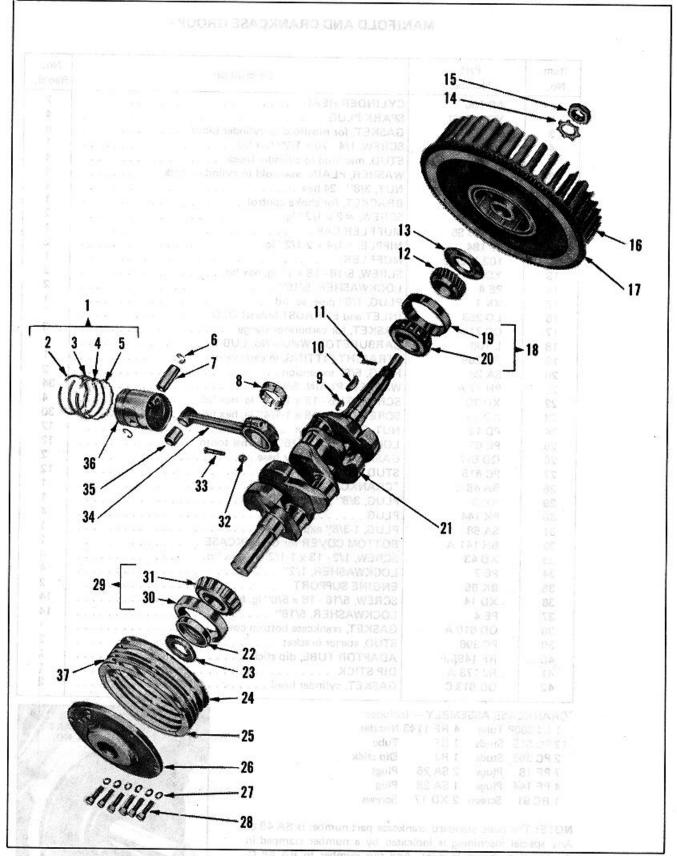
CRANKSHAFT, PISTON AND CONNECTING ROD GROUP
